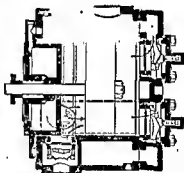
Single-cylinder Two-stage Vacuum Pump.
